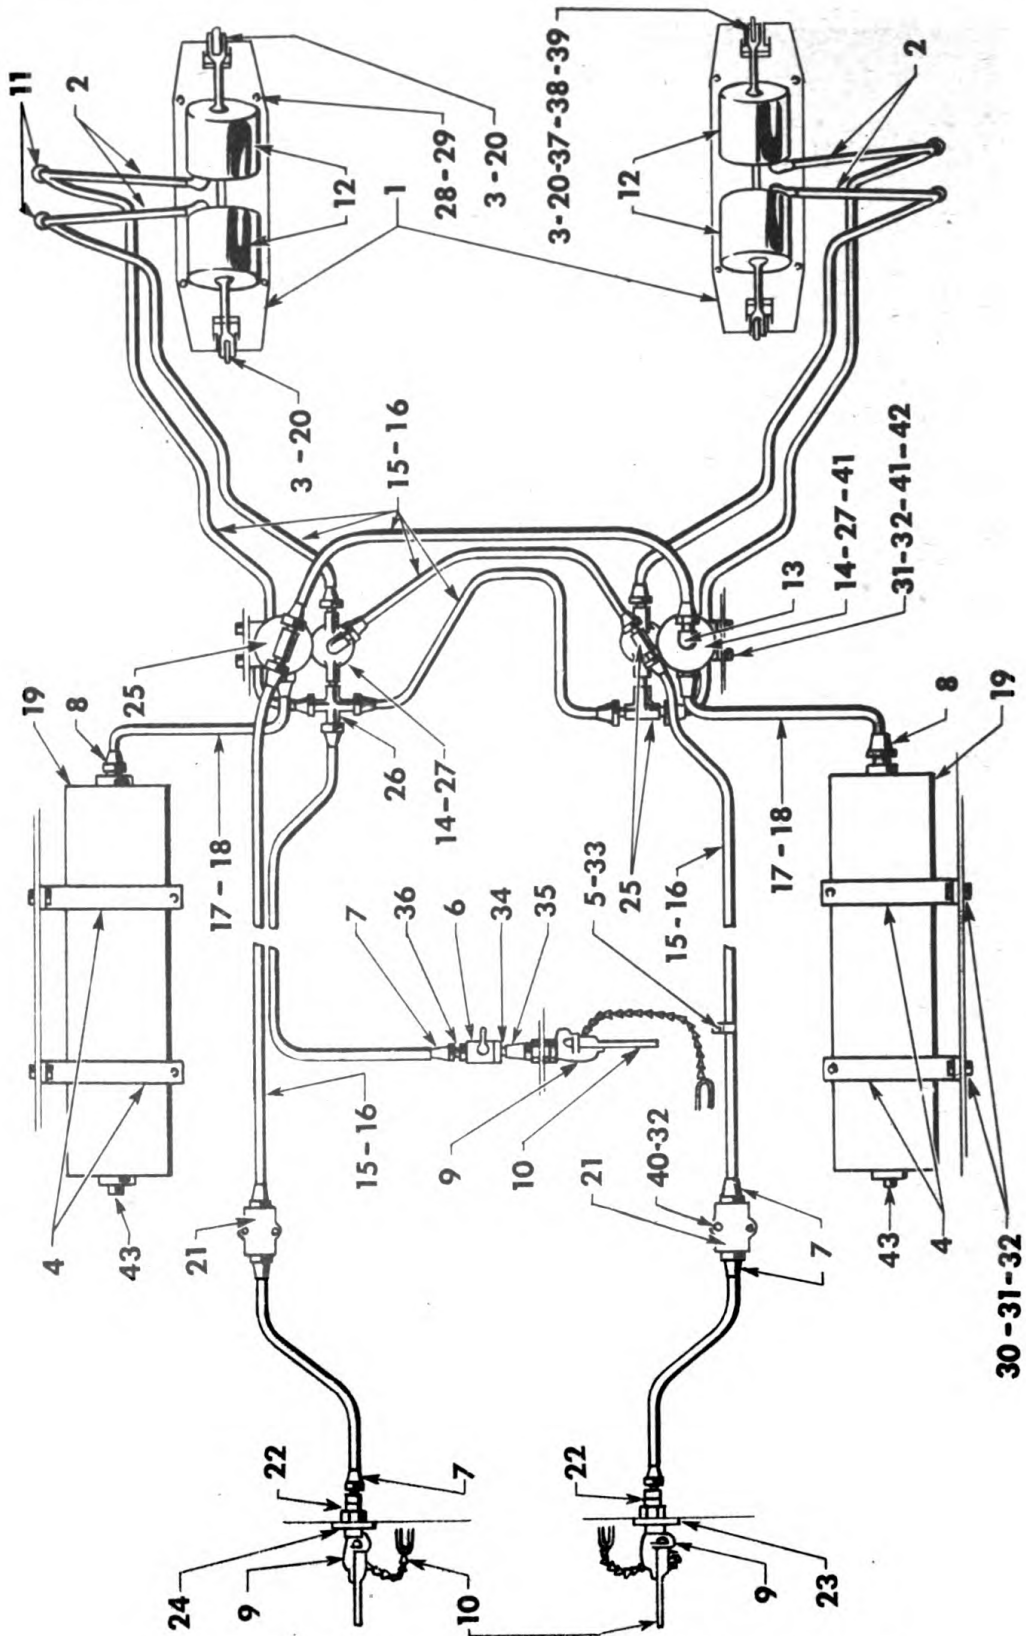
OPERATING PARTS FOR BRAKES—TRAILER
